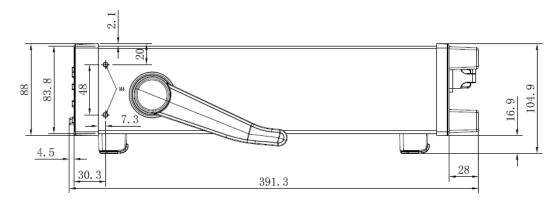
Mechanical dimension drawing of PA310 power meter (side view)
